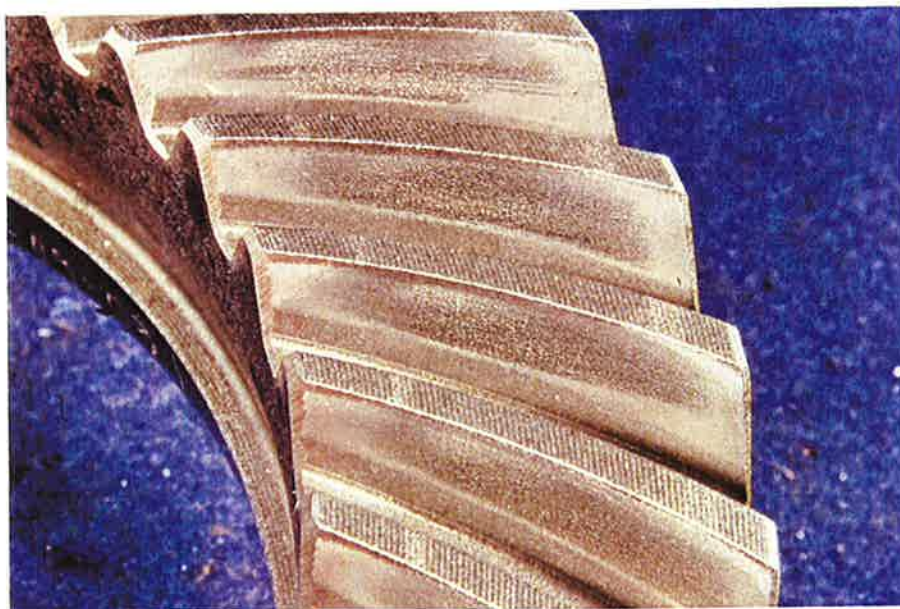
SWRI SAMPLE TYPICAL GEAR CONTACT PATTERN ON TOOTH COAST SIDE.
